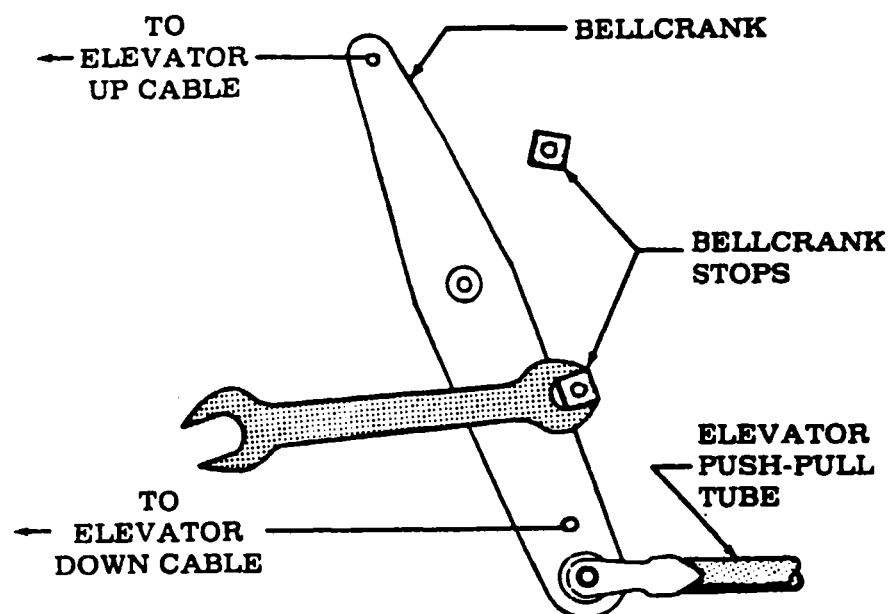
Elevator Bellcrank Travel Stop Adjustment
